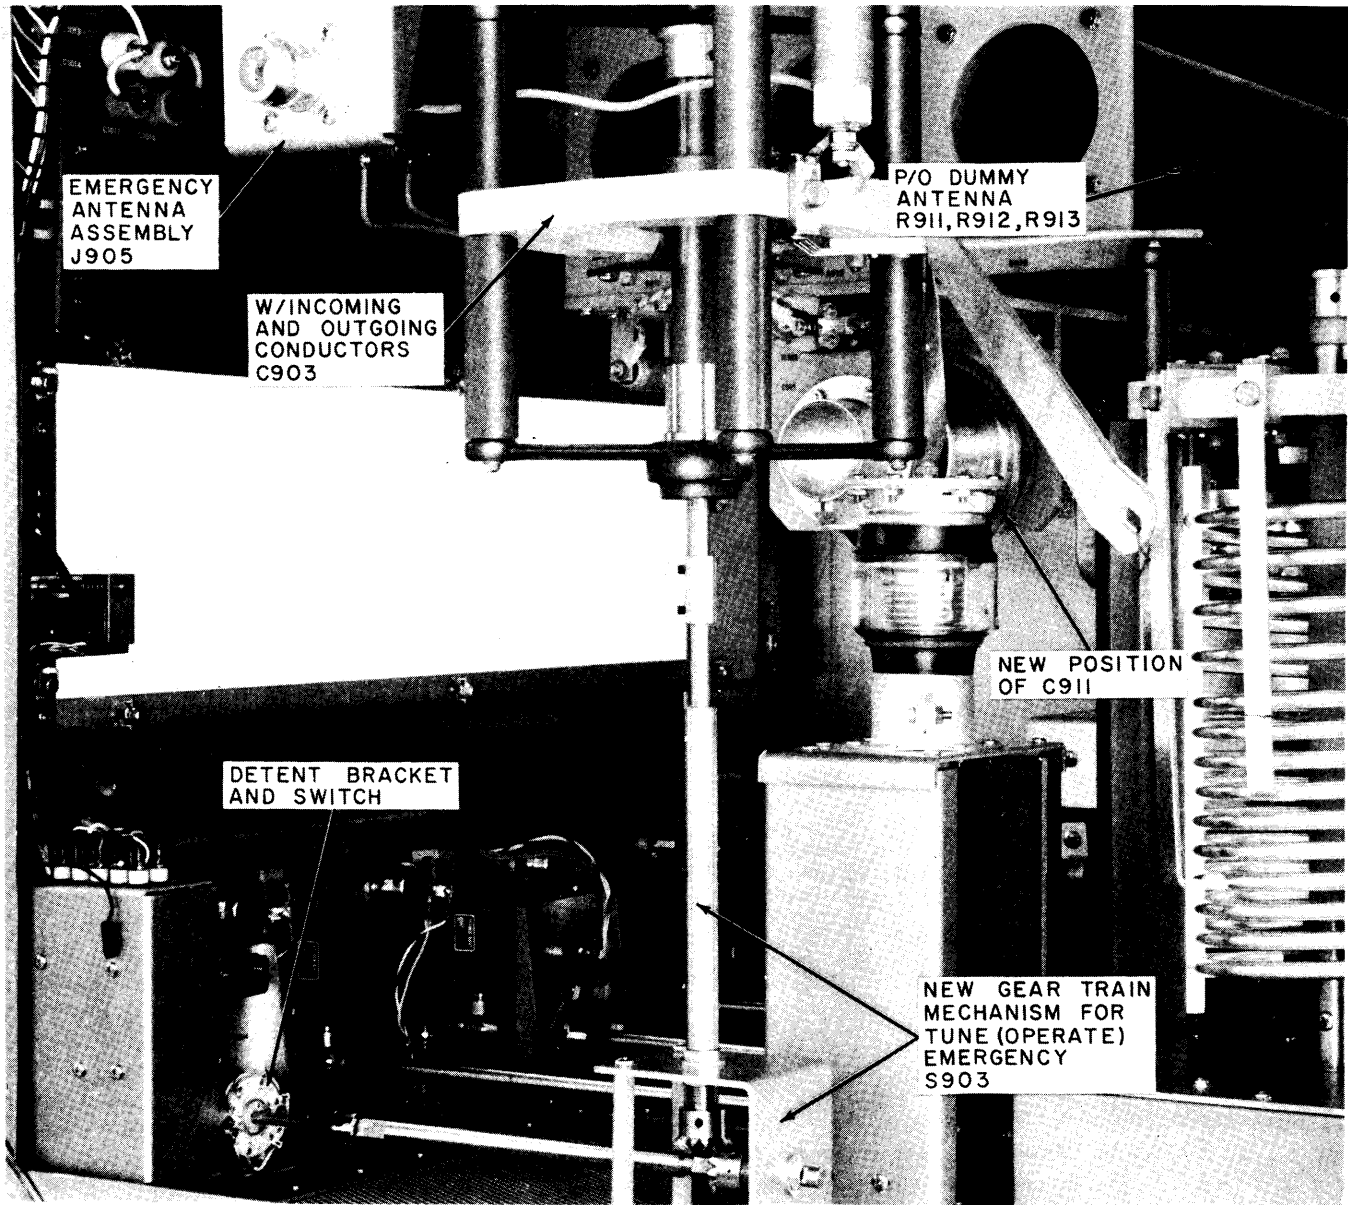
Modified GPT-10K's PA Compartment with Callouts on Changed Components, 45-Degree Angle Side View
